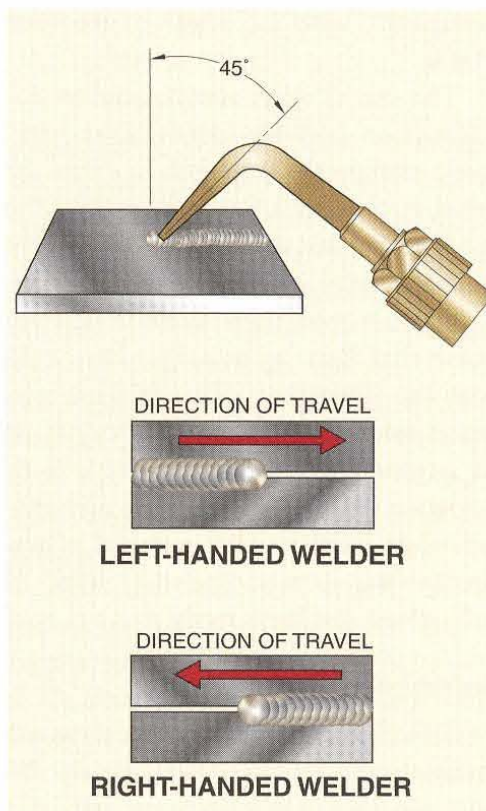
To move the weld pool across the workpiece, hold the torch at a 45° angle and manipulate it in a circular motion.
